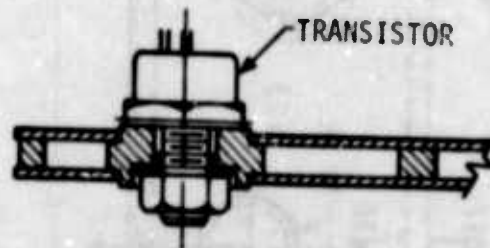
Transistor Mounting on Liquid-Cooled Cold Plate No. 3
